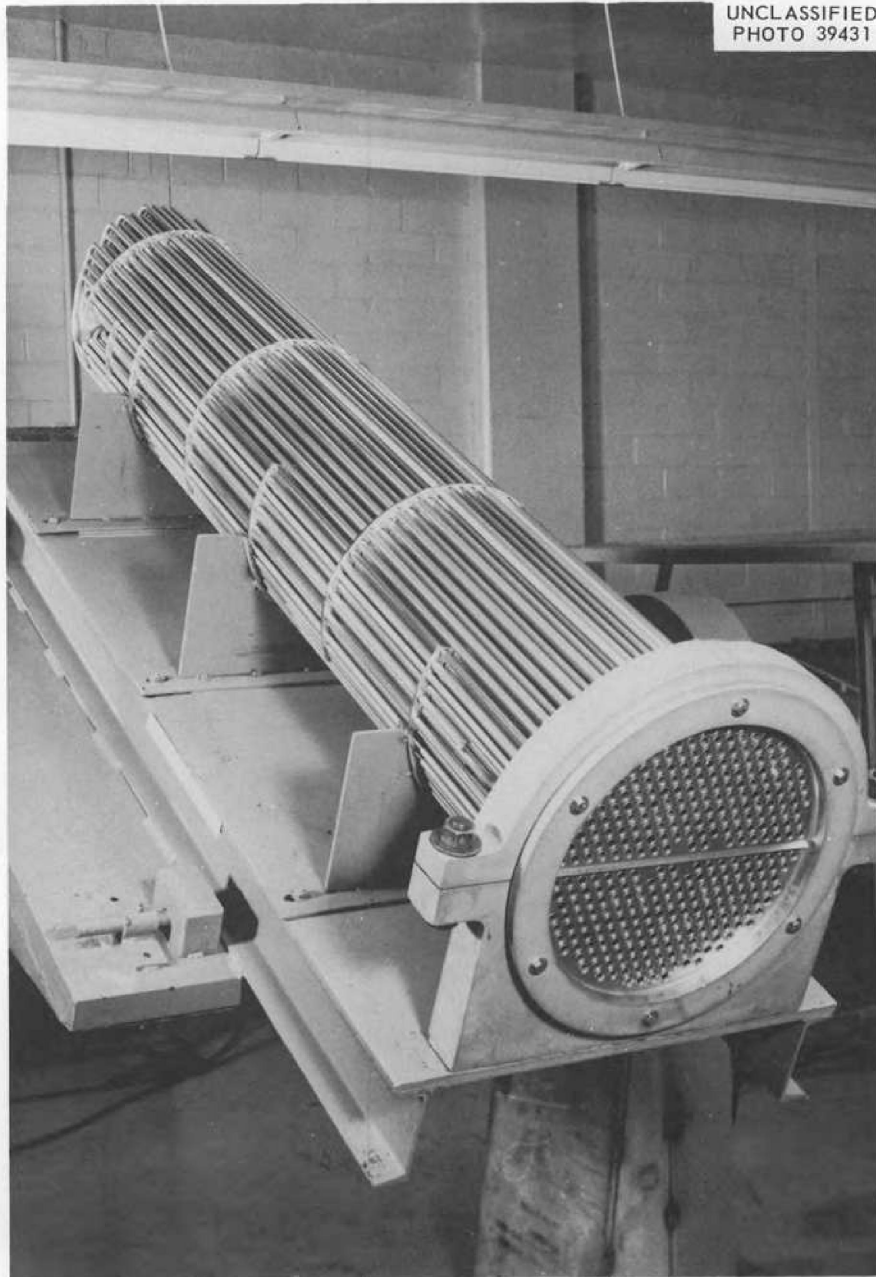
Completed Tube Bundle Mounted in Fixture.
